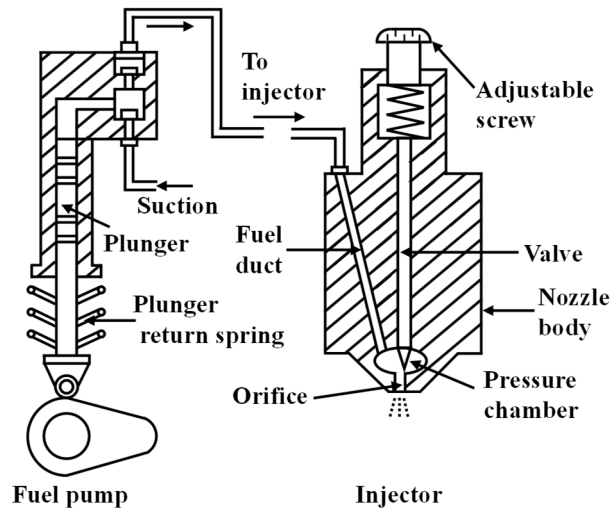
Schematic of a fuel feed pump and injector [4]
